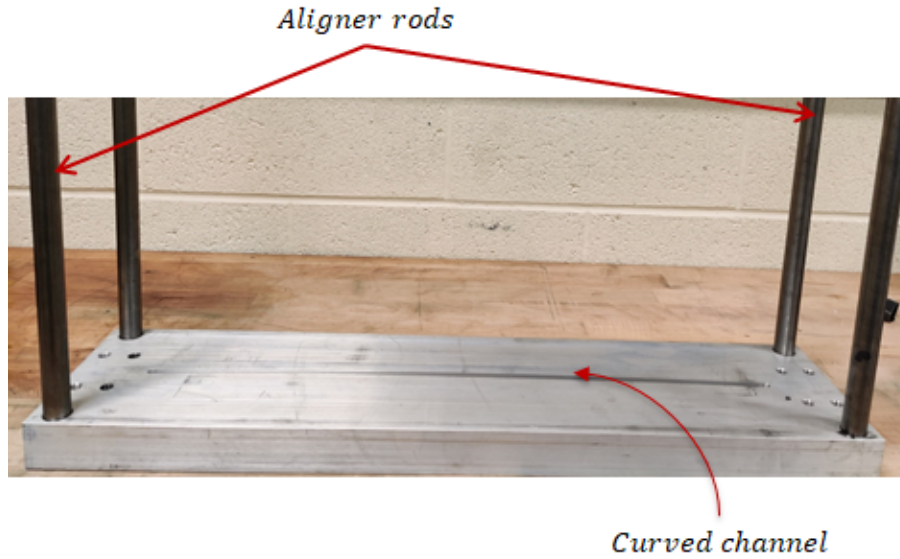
Bottom fixture showing curved channel and attached aligner rods
